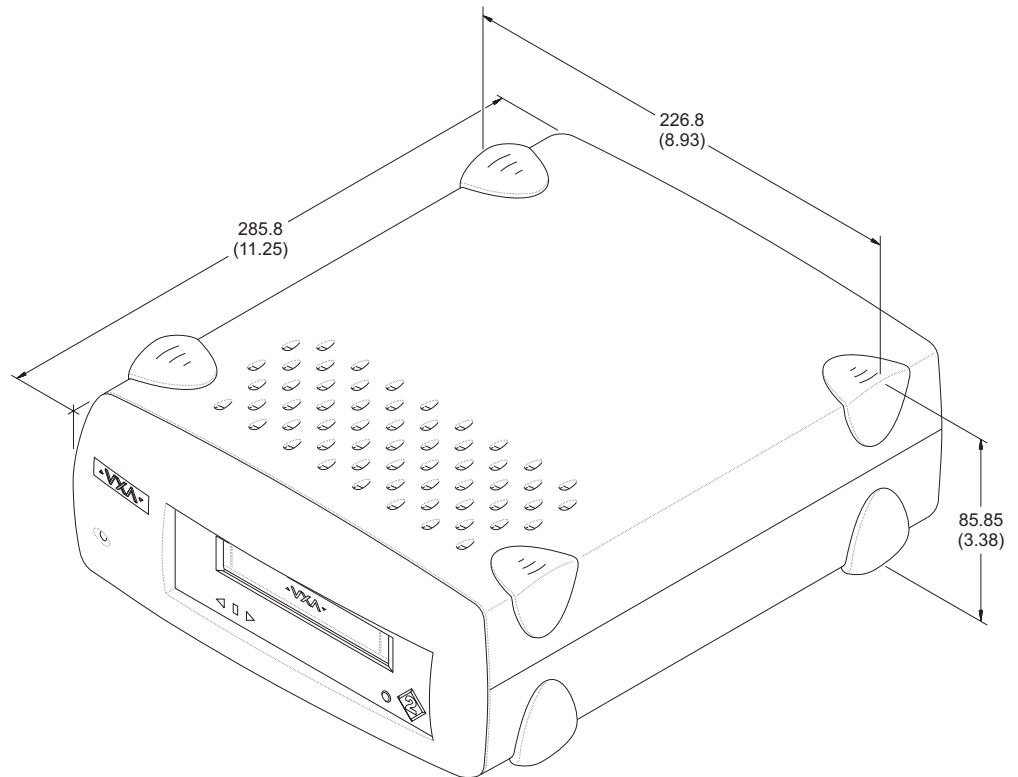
Physical dimensions of the external model in millimeters (and inches)
